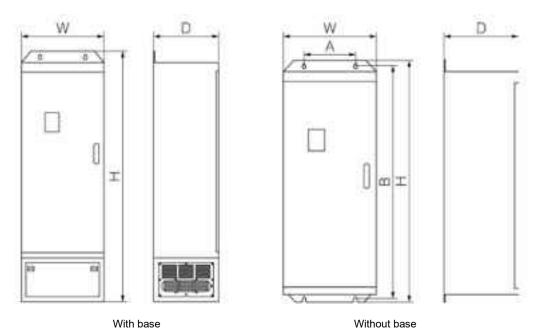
Outline dimensions of 160-350 kW models (380 V)
